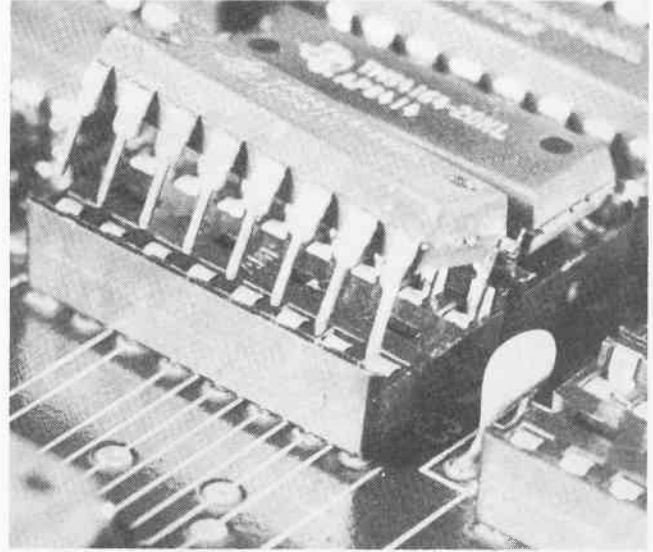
ICs can be removed with a chip extractor or by gently prying up with a tiny screwdriver (tweezer).
